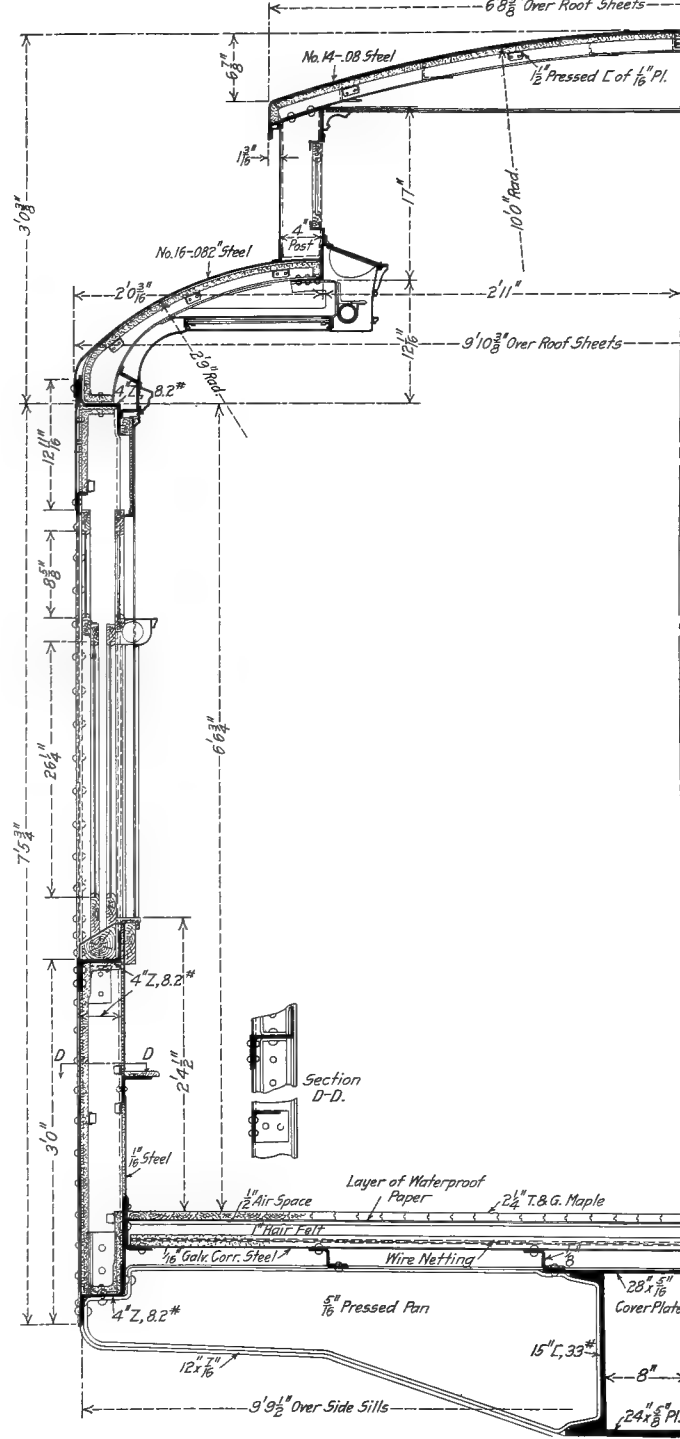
Cross Section Through Chicago, Burlington & Quincy Dining Car Shown in Figs. 400-402. Builder, the Pullman Company.
